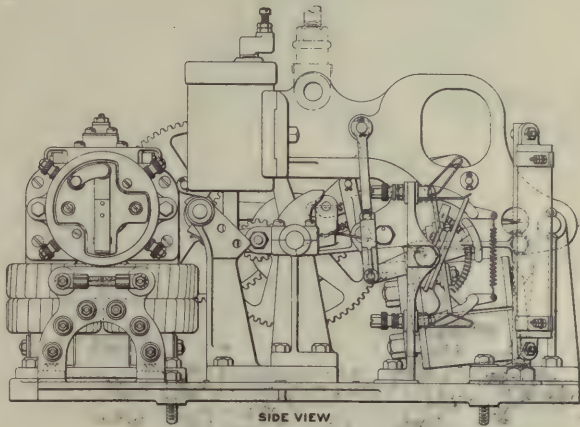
Multiple Unit All-Electric Interlocking Machine. Eight Levers. Union Switch & Signal Co.
